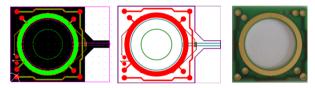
EDA (Electronic design automation) drawings of pipette PCB showing the fluid channel linking the round compartment in the center with the outlet tip. Right: finished cover-PCB
